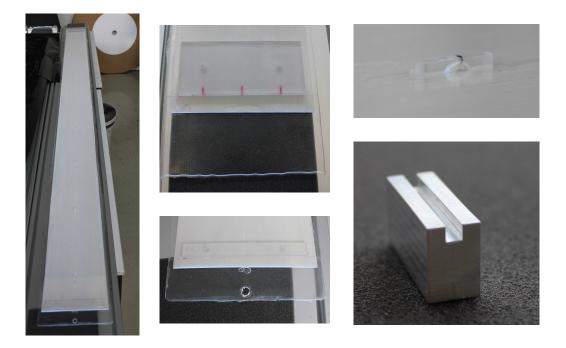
Step 11: Casted fibre mat after unforming from casting jig (left), lower endpiece half readout and mirror side (middle two), zoomed view of a casted alignment pin (upper right), precision gauge for quality assurance of alignment pin width (lower right).
